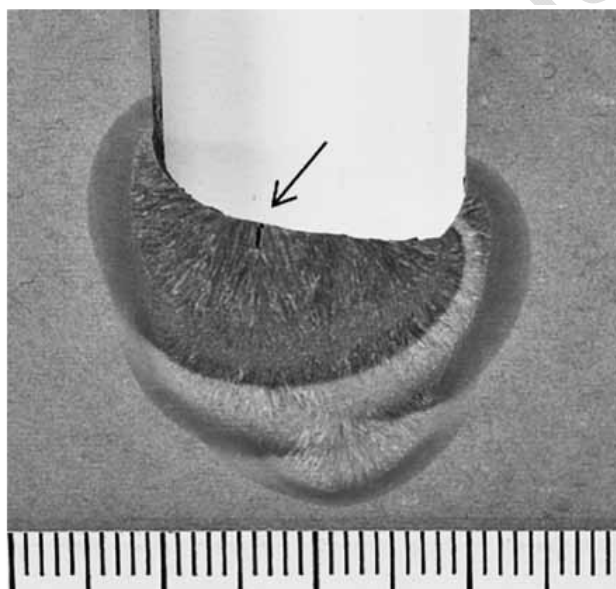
Hot cracking in narrow-gap B91 SAW welds.
